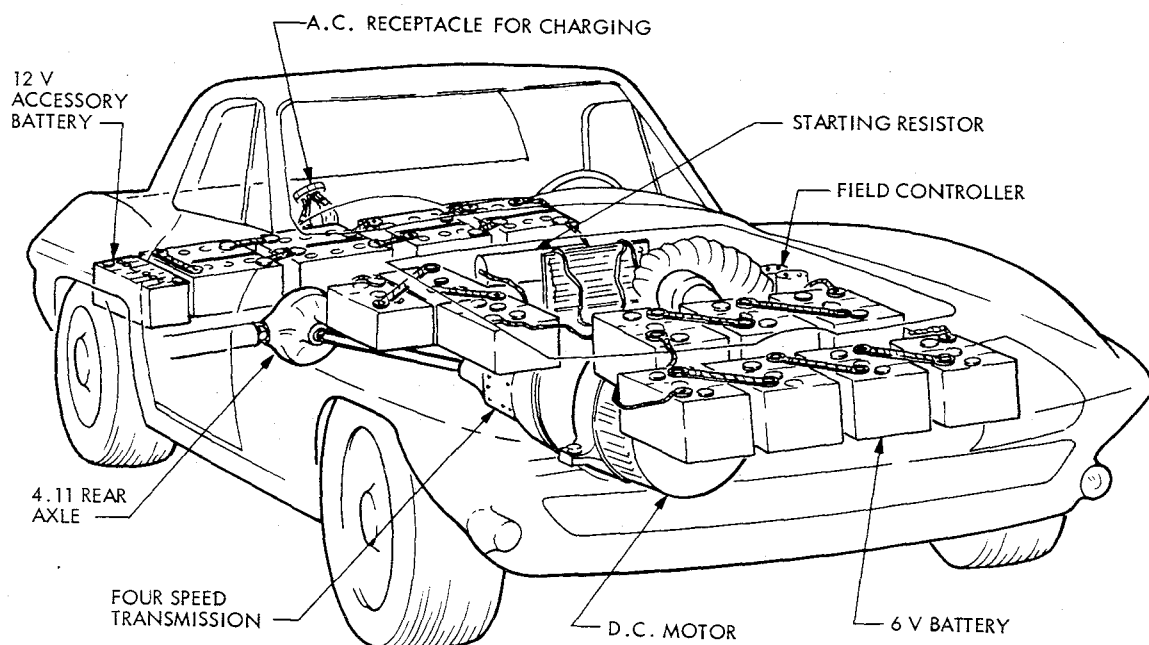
Cross-Sectional View of Corvette Showing Component Placement (Scale Not Exact)
